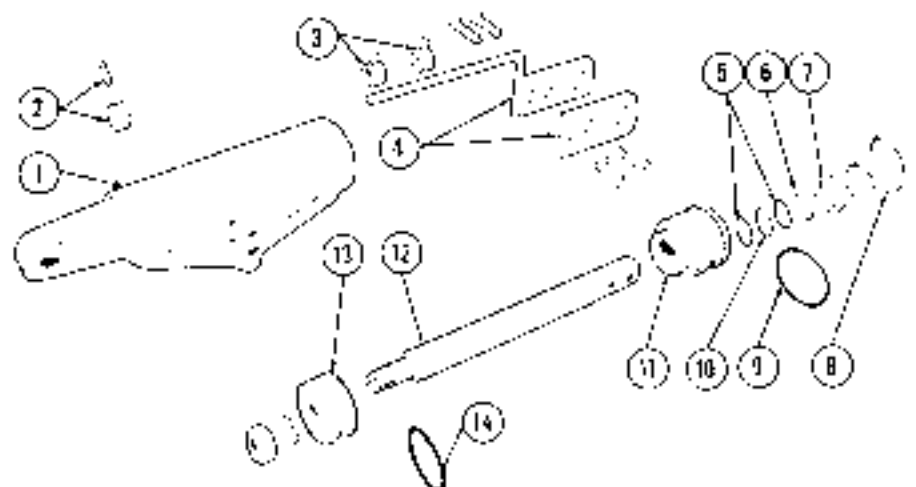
Exploded view of Pony hydraulic lift work cylinder.
